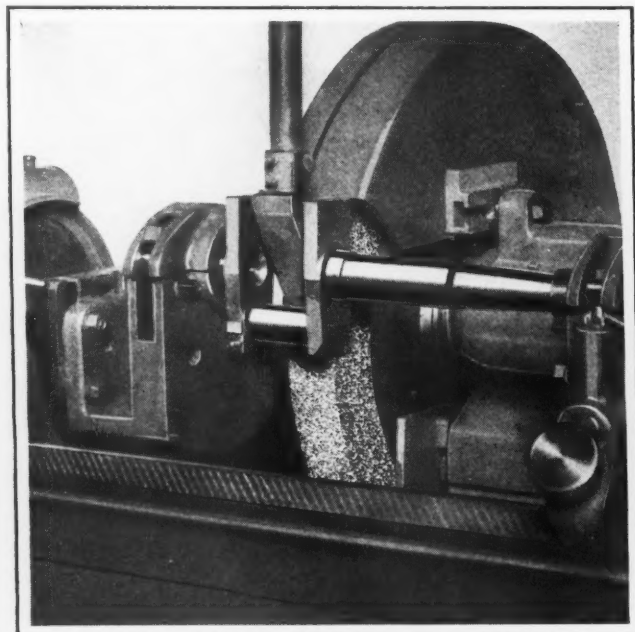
More Elaborate Fixture than that Shown in Fig. 2, known as the "Cradle" Type, which is Adjustable for Varying Throws
